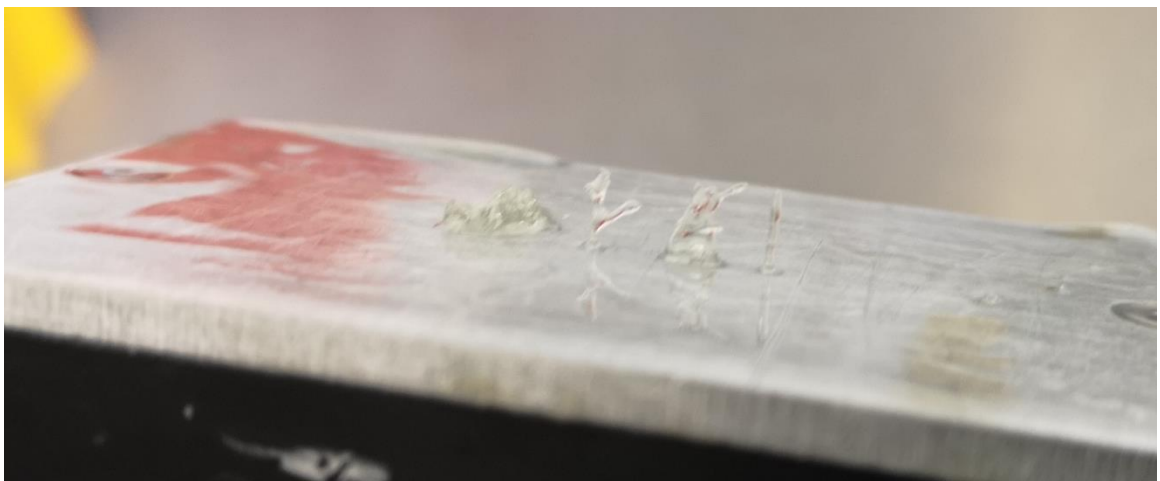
Failed attempt at a tilted tube printed with typical stereolithography support structures. A blob of supports and collapsed initial layers of tube can be seen to the left side, with support 'trees' having been printed well but without the tube to link up with.
